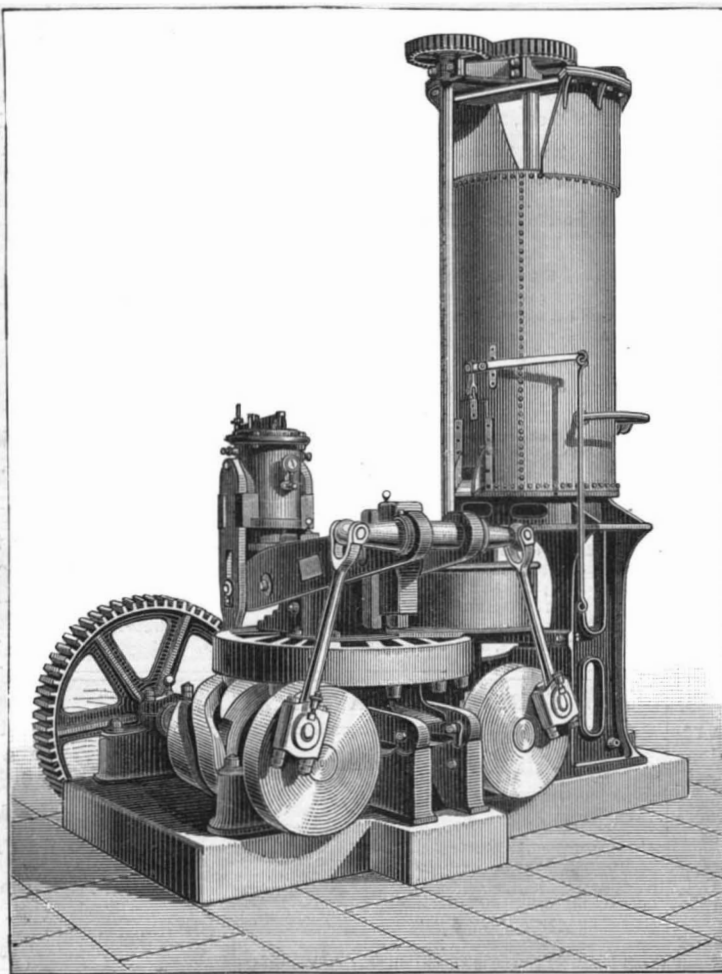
PRESSING MACHINE FOR ARTIFICIAL FUEL.
